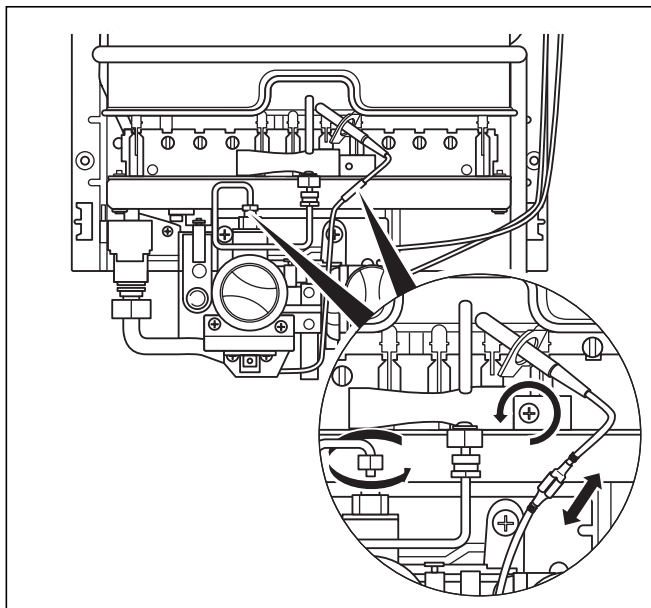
Removing the ignition gas filter and the ignition electrode
